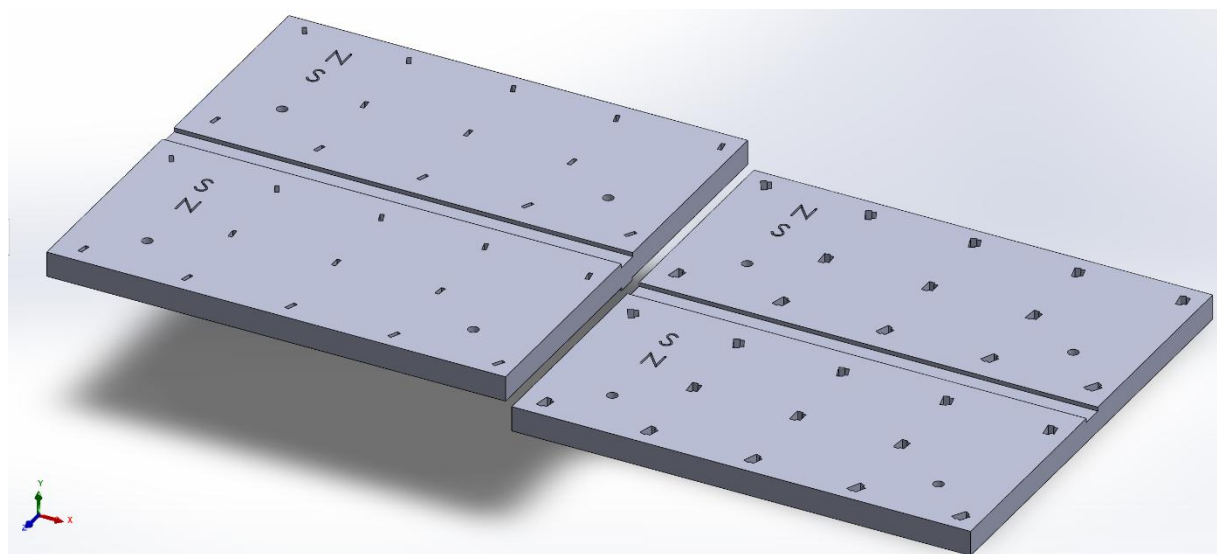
CAD model of the demagnetisation test fixture holding 26 magnets. Dimensions: 220 x 220 mm
